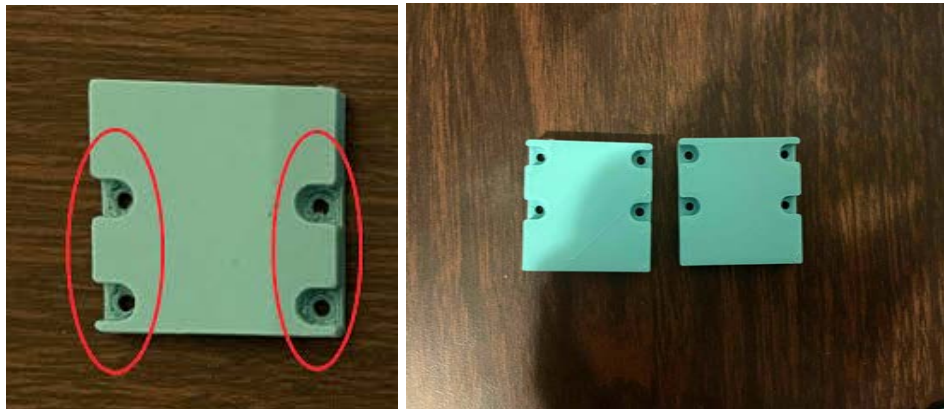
Clean out holes circled in red for part Pico\_Case\_Front.
